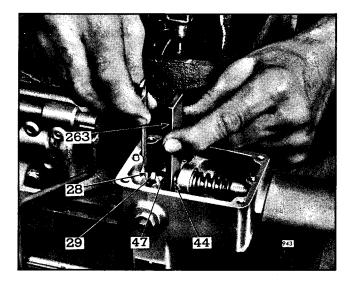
Adjusting Governor Gap-Tool J 5407
